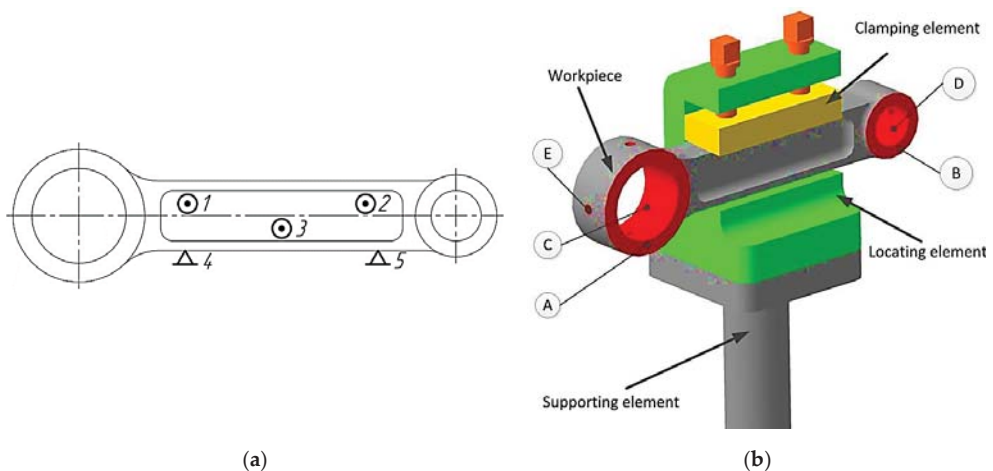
Flexible fixture for machining a one-piece connecting rod with machined surfaces in a CNC multi-purpose operation: (a) Locating chart; (b) 3D visualization.
